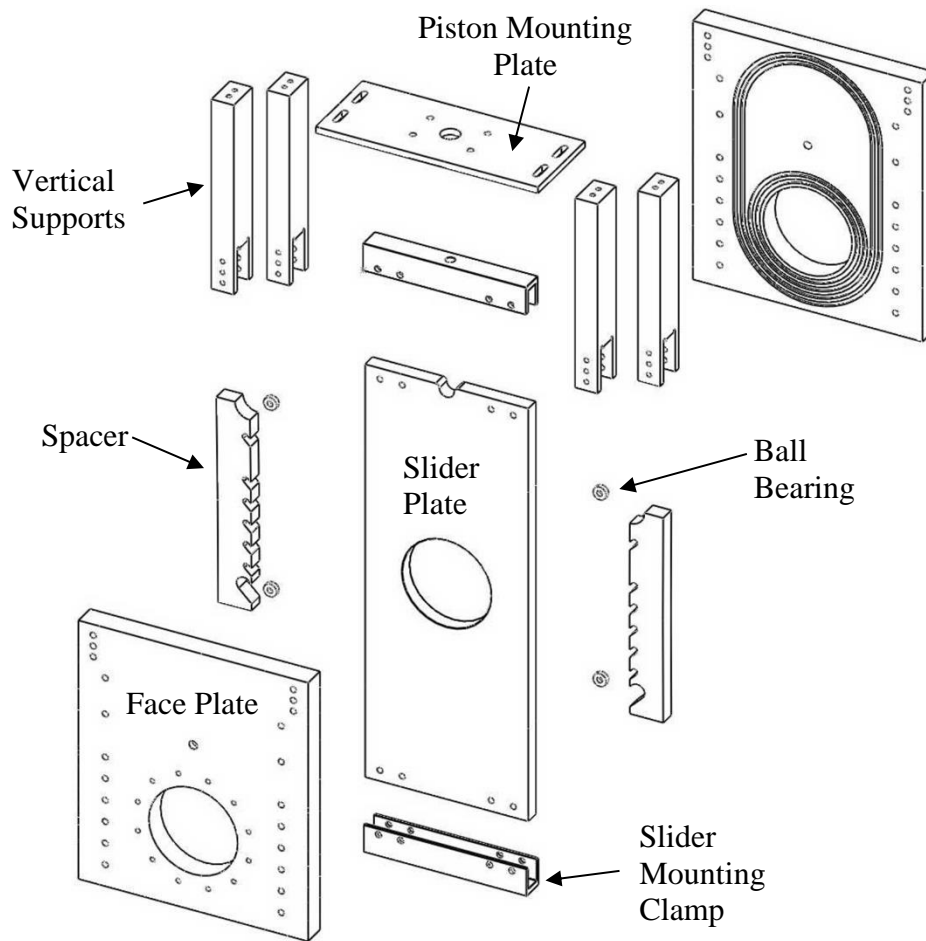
Exploded view of gate valve components. The pneumatic piston is not pictured here.
